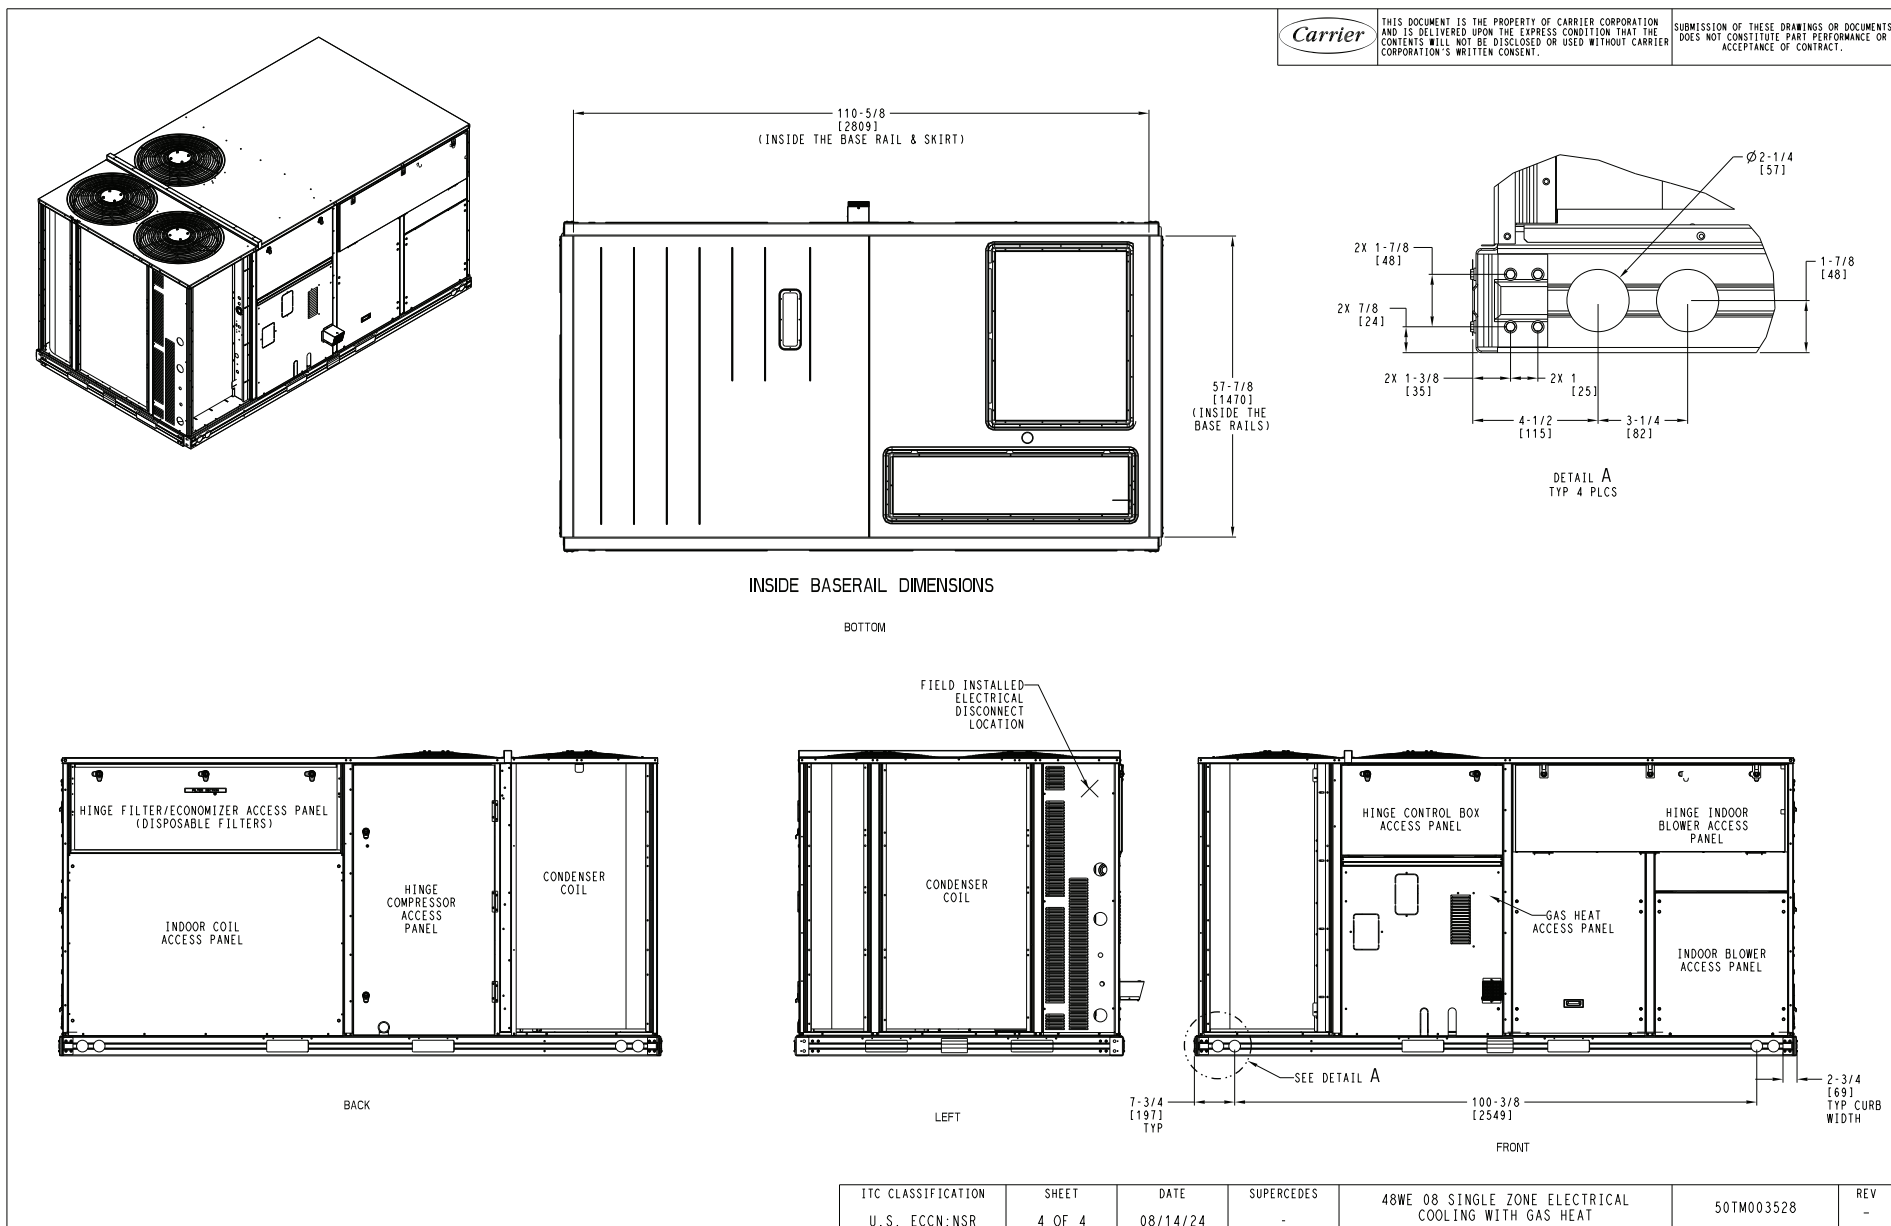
Unit Dimensional Drawing, 48WE*H08, Single-Zone Electric Cooling with Gas Heat (cont)
